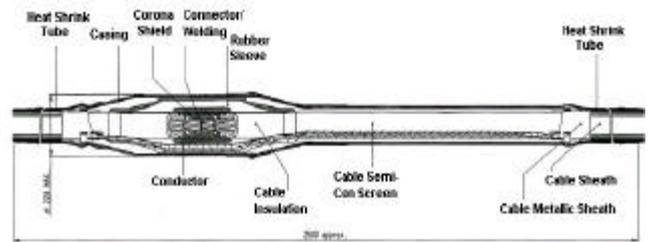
Premoulded Straight Joint for extruded cables with Cu or Al conductors
